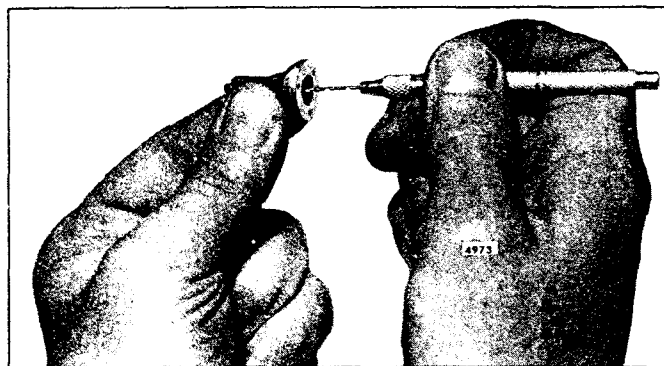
Cleaning Injector Spray Tip with Tool J 24838
